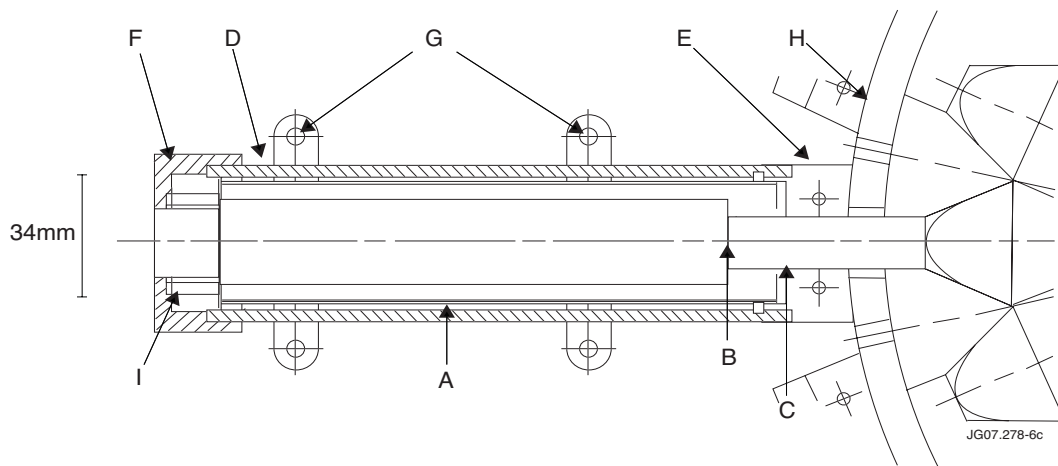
Drawing of the SI PM tube assembly showing the interface between the PM tube (A), the optical pad (B) and the light guide (C) and the surrounding mounting structure. The parts are (D) a soft iron holder tube with the PM tube on the inside, (E) a separate front piece firmly attached to the light guide, (F) a separate back piece held in place by screws, (G) two holder bar pairs on screws attached to the base plate, (H) the SI central enclosure ring and (I) a spring pushing the PM tube towards the light guide.
